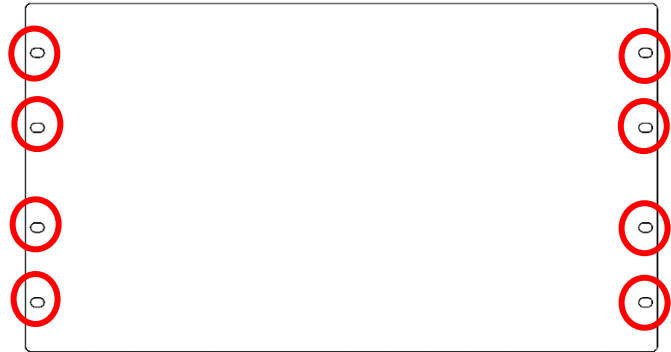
8x slotted mounting holes on front panel of units measuring 6U-8U in height.
